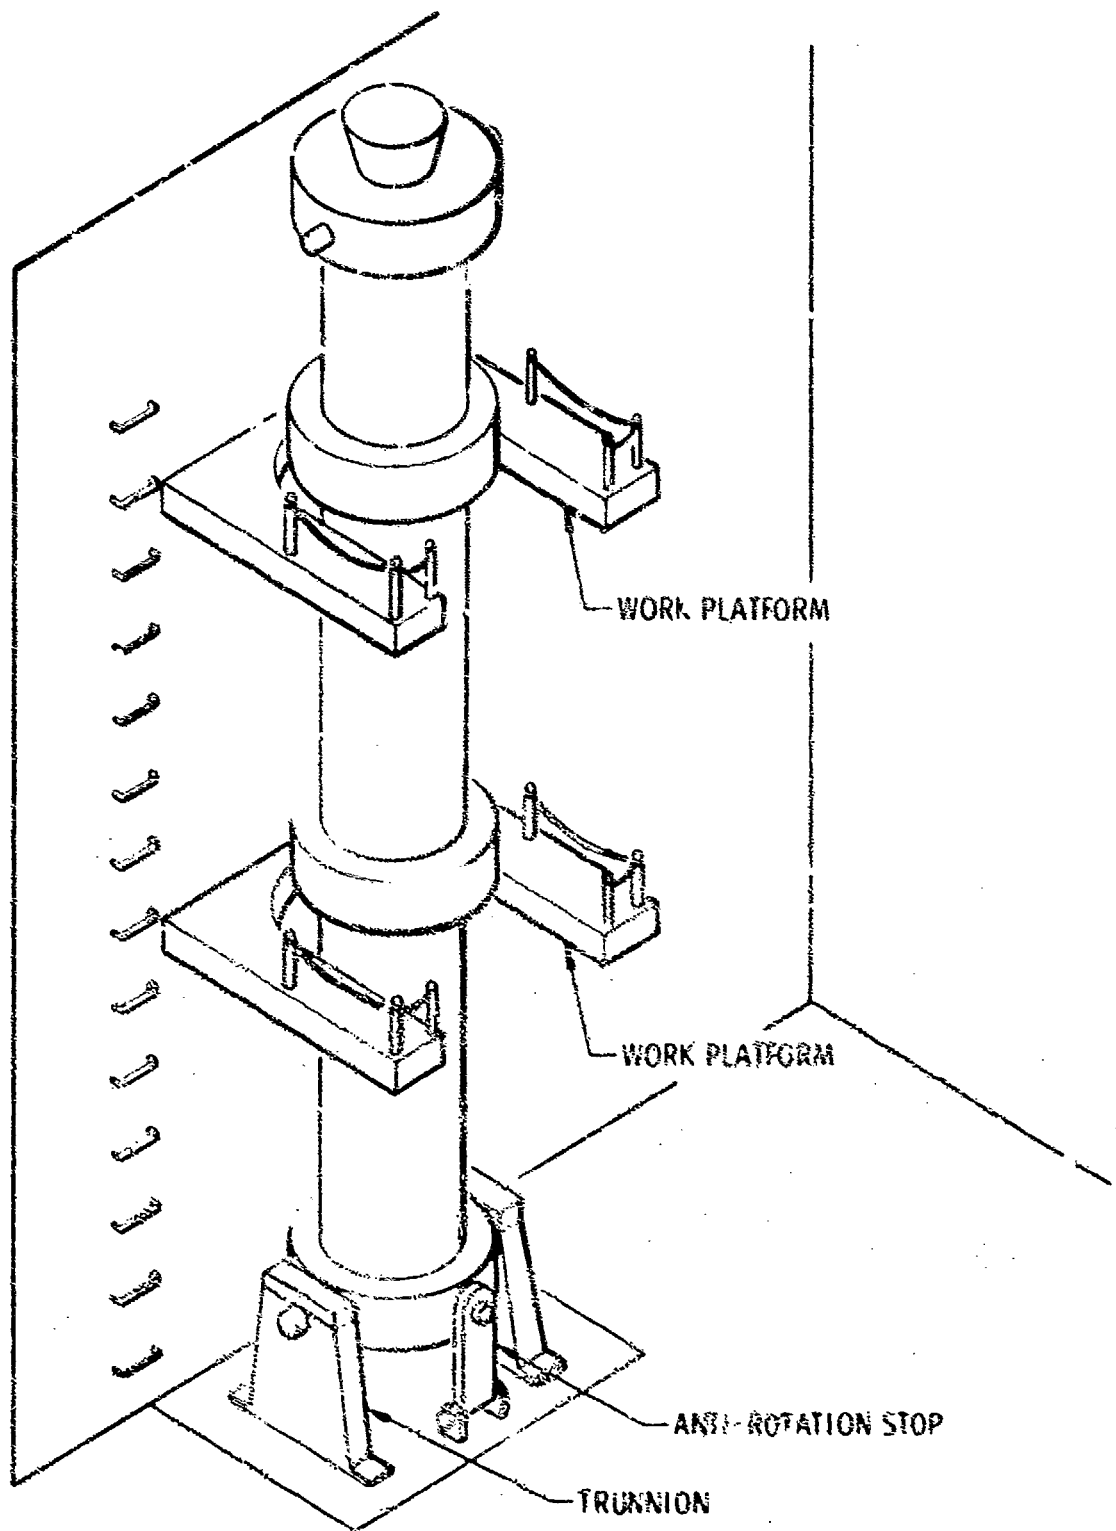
Test Motor Assembly in Vertical Assembly Fixture
